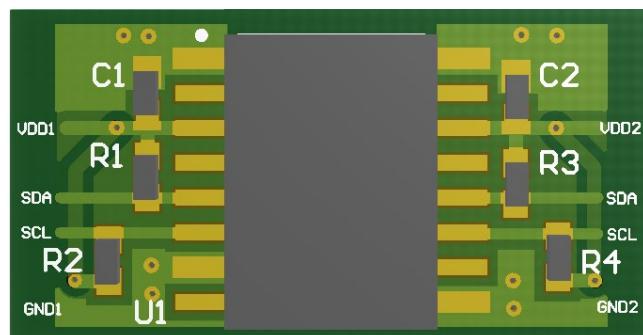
NSI8200-DSWR Recommended PCB Layout
